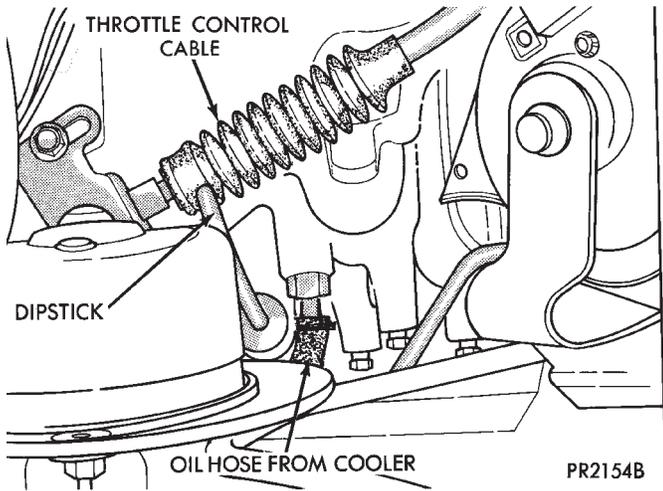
Remove Upper and Lower Oil Cooler Hoses
